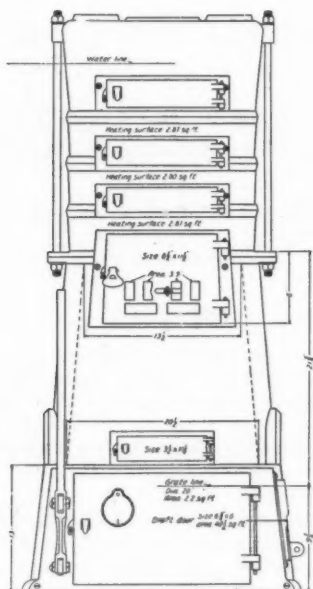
FRONT VIEW OF COMPLETELY ASSEMBLED BOILER
